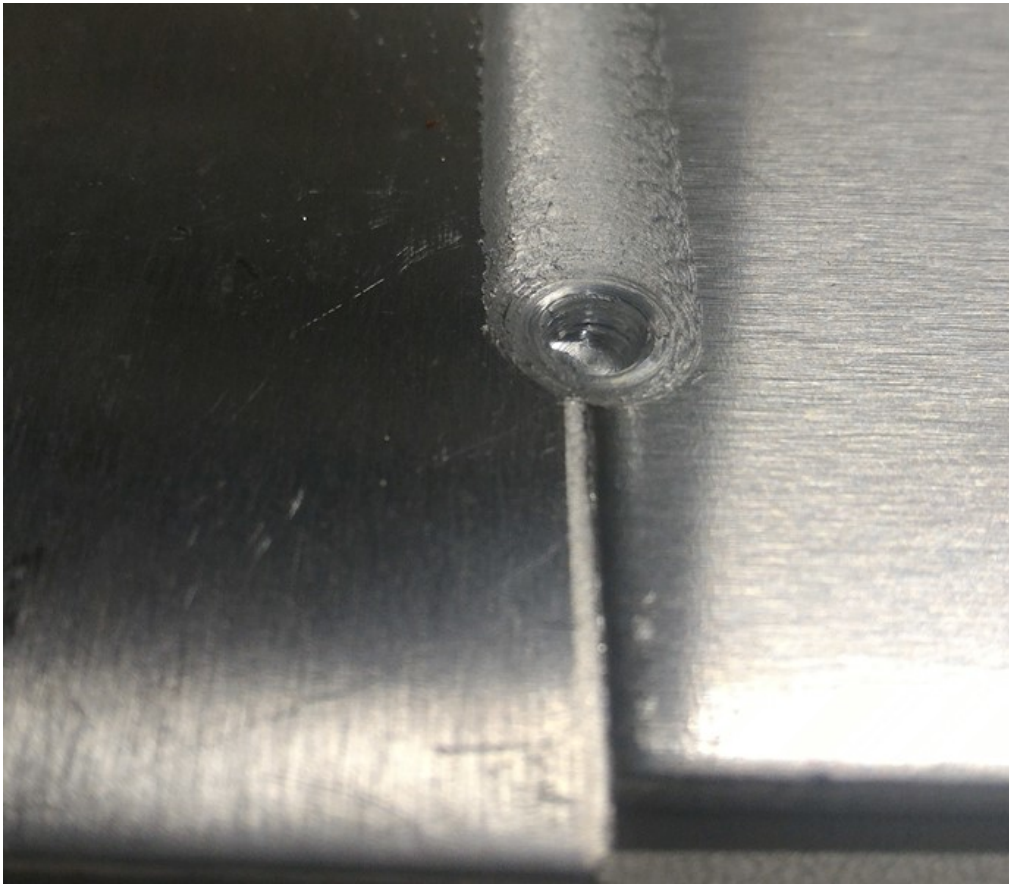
Probe exit of the welding of Case 6.
